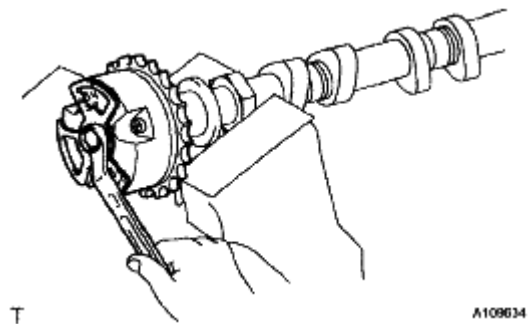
Tightening Flange Bolt With Camshaft Timing Gear Fixed
